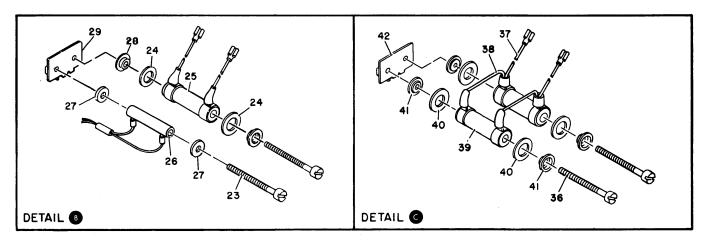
LVPS ASSEMBLY. SEE LIST 4.
